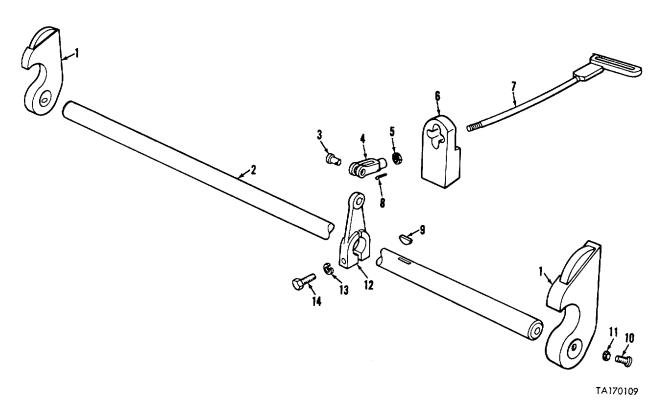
Moldboard carrying hooks, control handle, and related parts.
